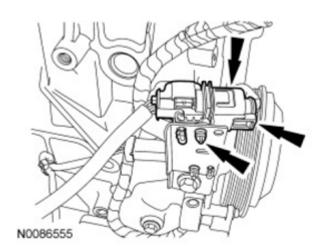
Locating Locking Tab And Heated Oxygen Sensor Electrical Connector Courtesy of FORD MOTOR CO.
